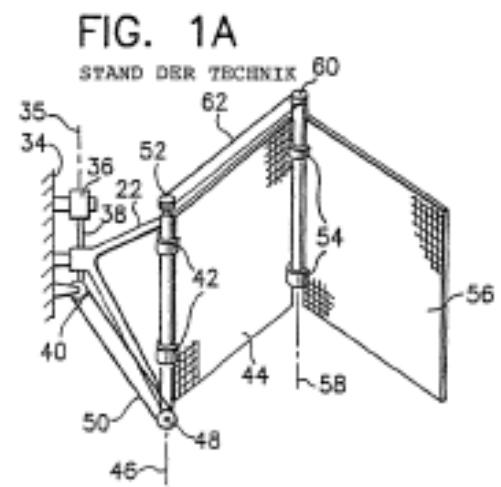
mechanism using electric motor for breaking, as described in EP-0754625-A1
